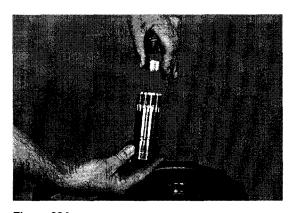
If stator support bushing was removed, install bushing in support. Install needle bearing in stator support.
